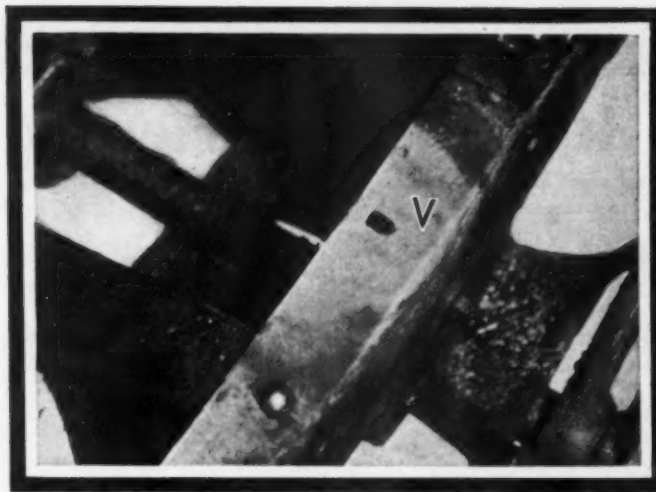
Crack in frame repaired by the hydro-oxygen process of welding
